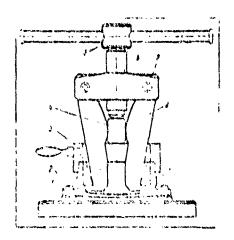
Pressing the cylindrical driving gear shaft bearing outer race from its cover:
